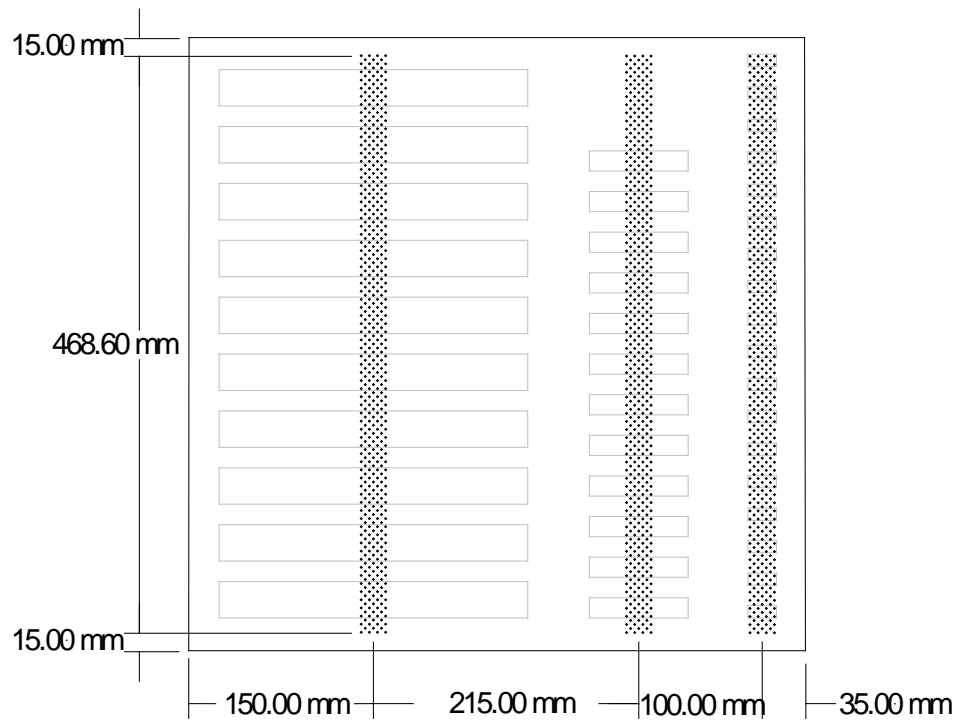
Final design for FlexPerf tooling and 5-Axis machining pattern
